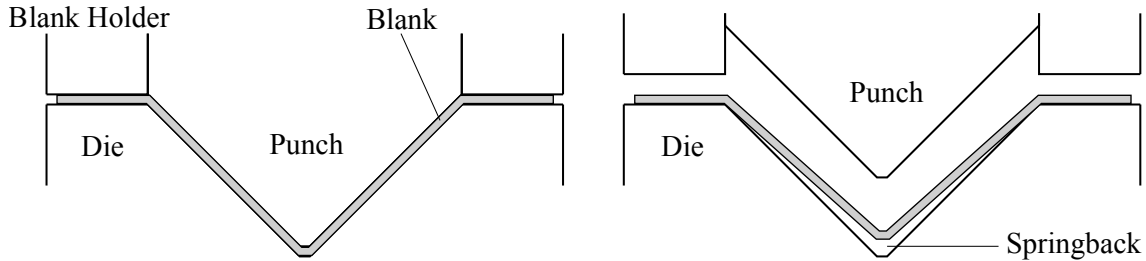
Left: Sheet metal forming during the final stage of the forming process, with the blank in black. Right: The springback can be seen as the gap between the blank and die, after removal of the punch.
